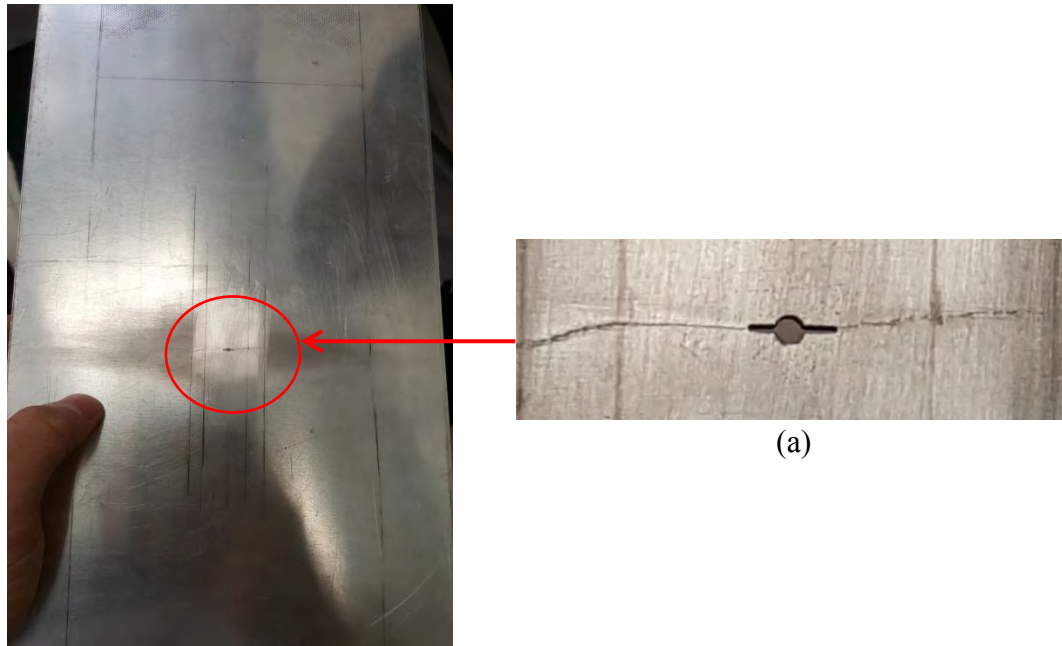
Fatigue crack on the aluminum plate with (a) enlarged crack picture
